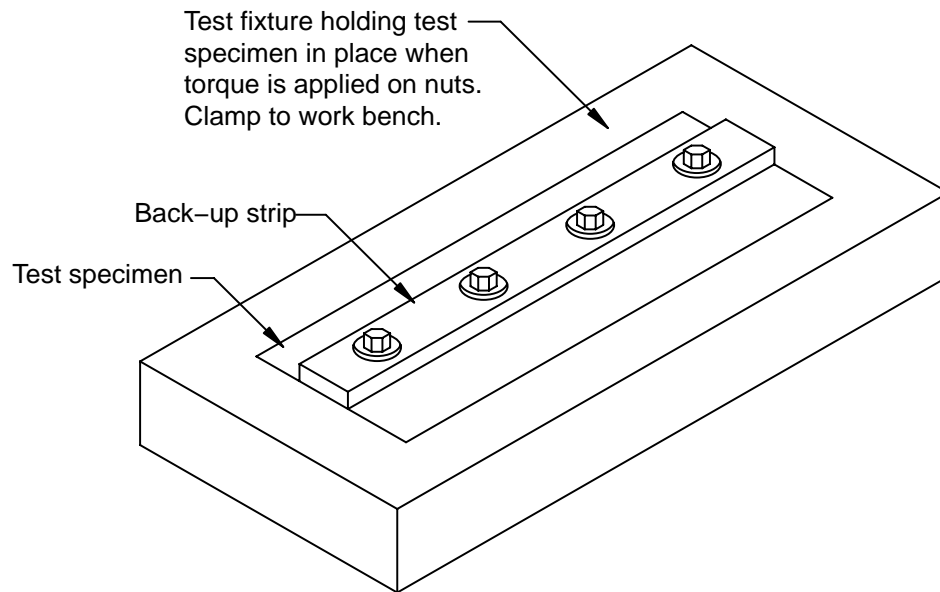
BOLT PULL THROUGH TEST SETUP
